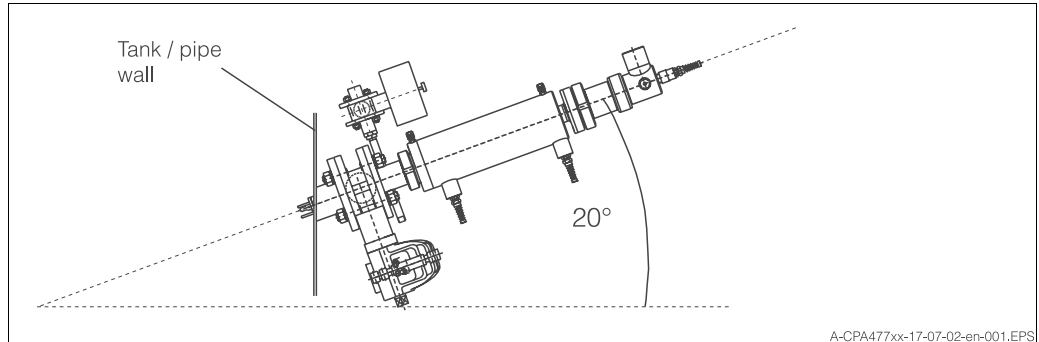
Installing the CPA 477. The installation angle should be 20° to the horizontal.
